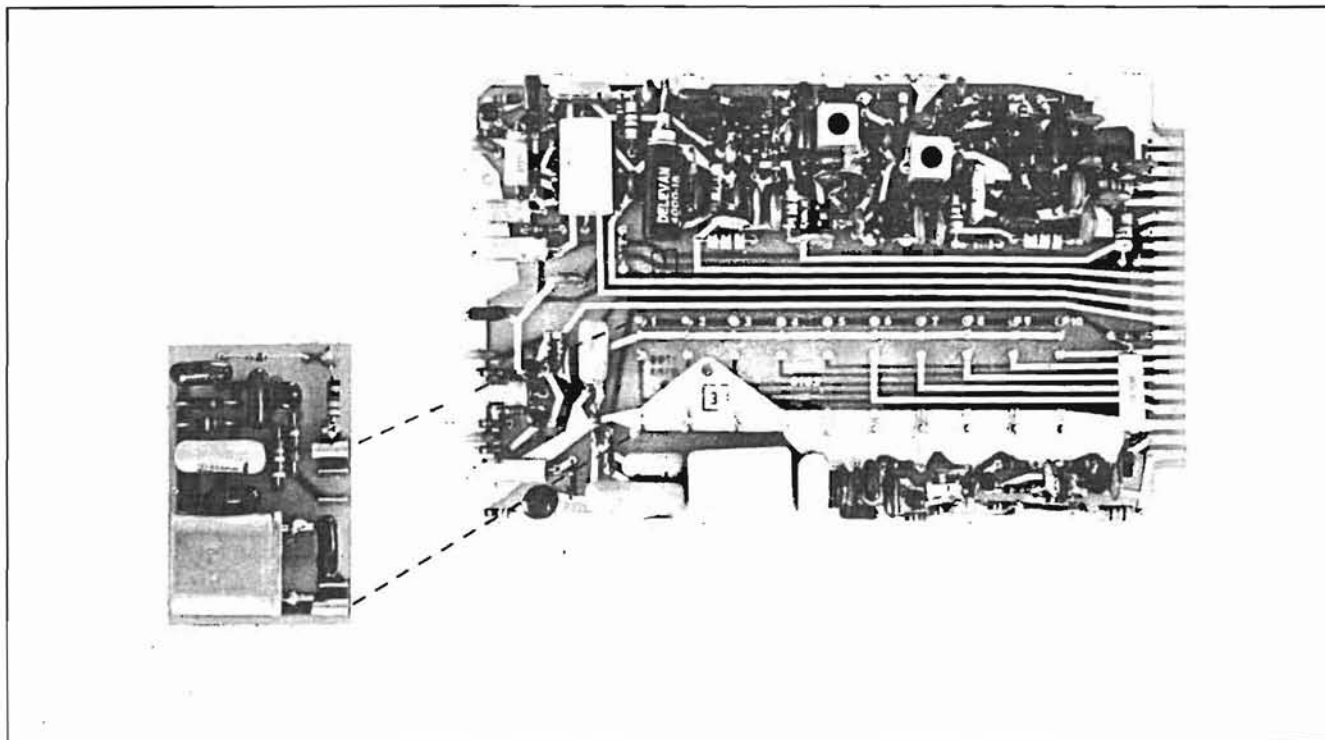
Installation-Removal, IF-Oscillator Boards
